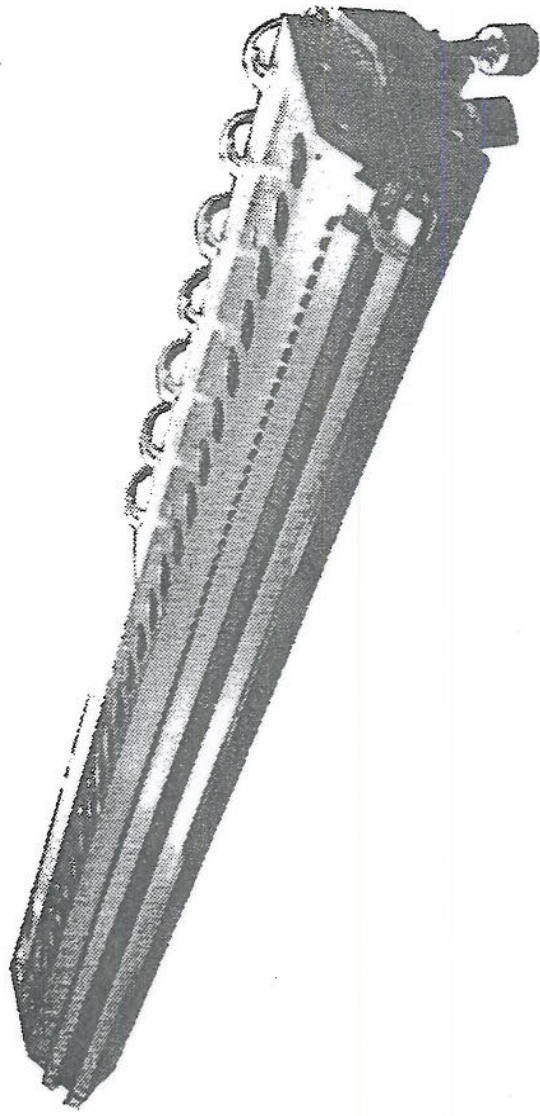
Designs of slot dies for casting flat film and thermoflexible sheet [65].
